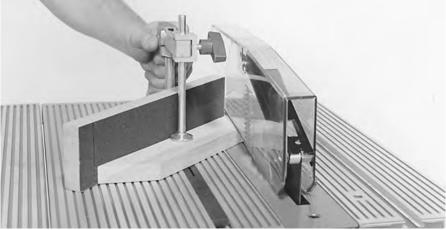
A fence extension that is faced with sandpaper provides a high friction surface that helps to keep the workpiece in place as you are sawing.
